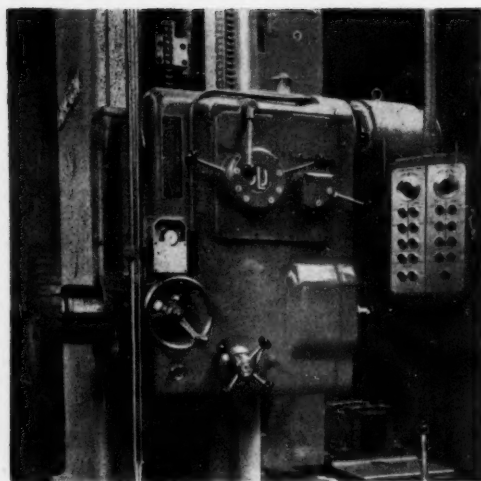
Close-up View of the Spindle Head and Pendant Control of the Machine Shown in Fig. 1. The 9-position Rotary Switches for Selecting Horizontal and Vertical Feed Rates can be Seen at the Top of the Pendant
